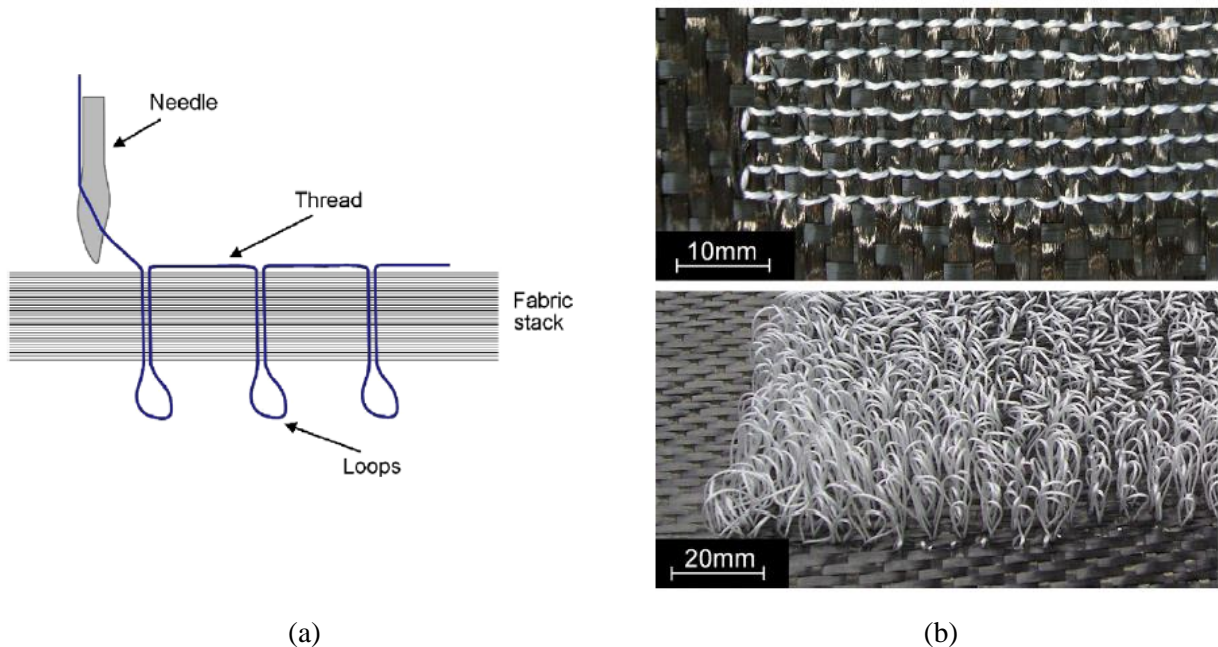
(a) Schematic of thread insertion by the tufting process; (b) top and bottom sides of carbon fibre preform tufted with glass fibre thread [33].
